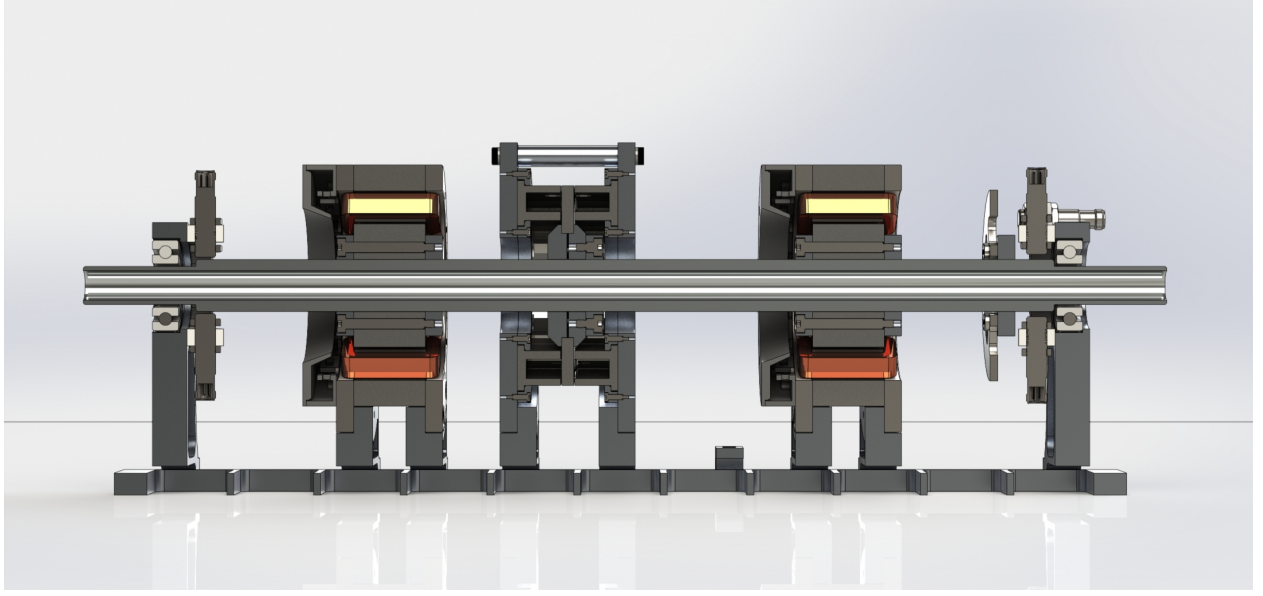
Cross-sectional view of the final bench-scale testbed design.
